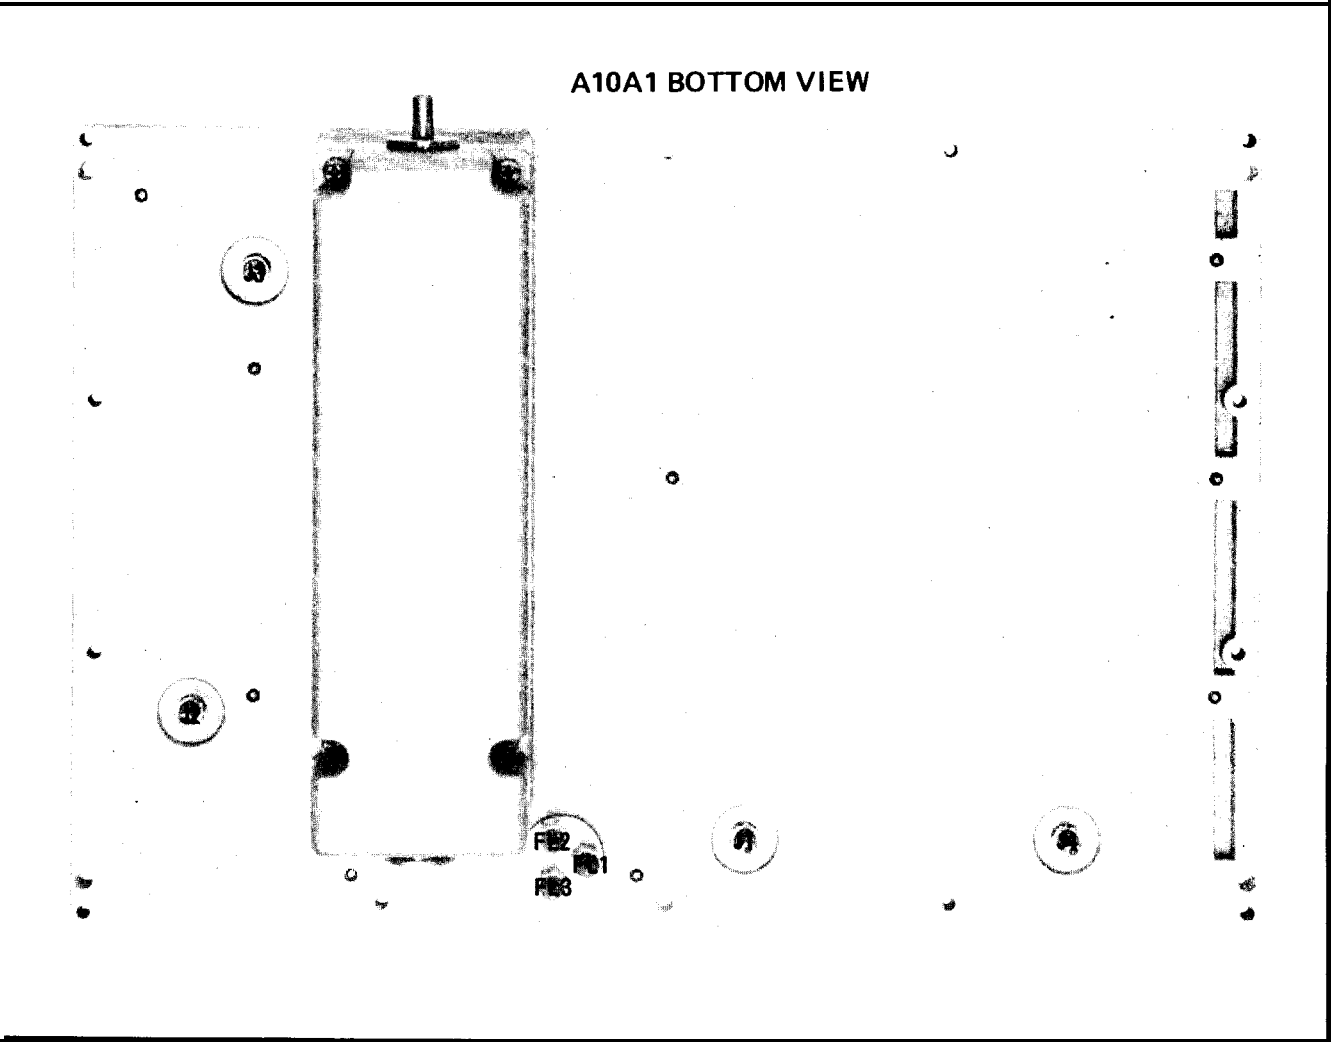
A10A1 RF Filter Assembly Component Locations (1 of 2)
